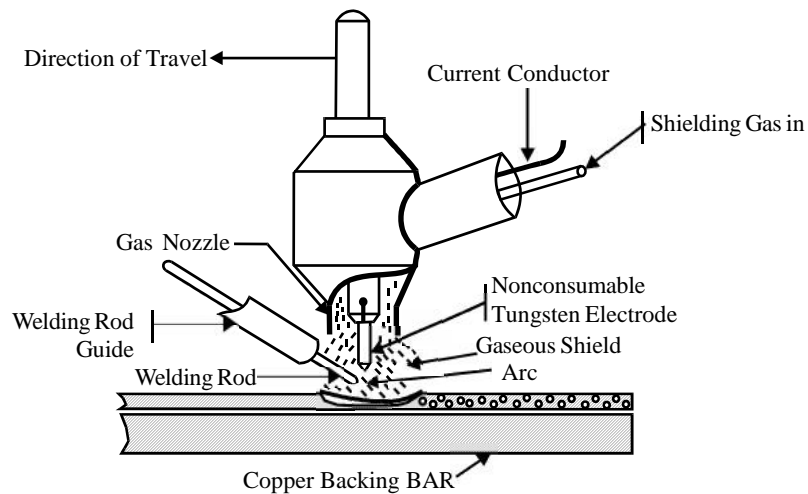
TIG Welding (GTAM Welding)
